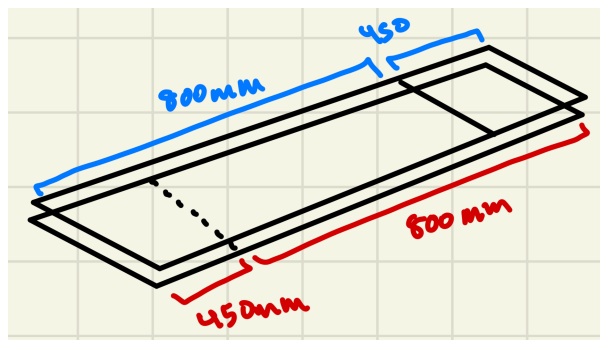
Diagram indicating how the cuts were made on the matboard with the blue indicating the cut location on the layer above and the red indicating the cut location on the bottom-most layer.
